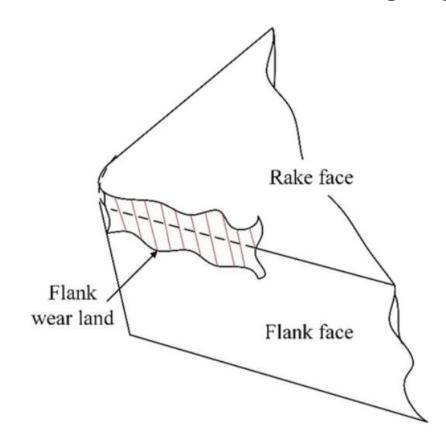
Schematic representation of crater and flank wear on a cutting tool [8]
